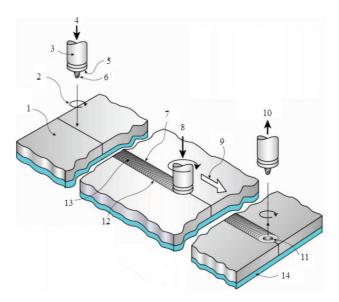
Illustrated scheme of friction stir welding [8] (1 - base metal, 2 - direction of tool rotation, 3 - weld tool, 4 - downward movement of tool, 5 - tool shoulder, 6 - pin, 7 - advancing side of weld, 8 - axial force, 9 - direction of welding, 10 - upward movement of tool, 11 - exit hole, 12 - retreating side of weld, 13 - weld face and 14 - base plate).
